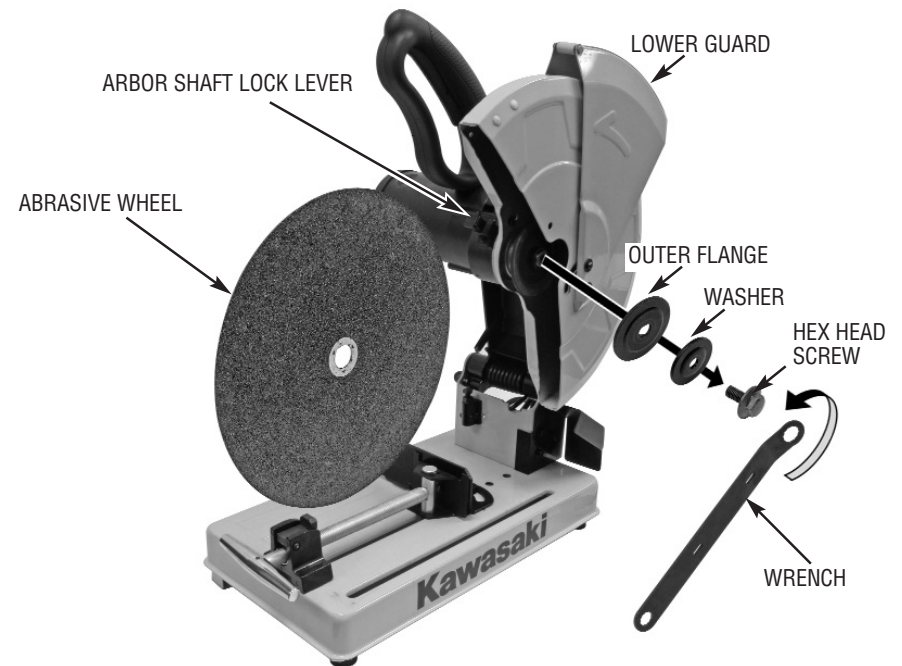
REMOVING/INSTALLING THE CUTTING WHEEL
